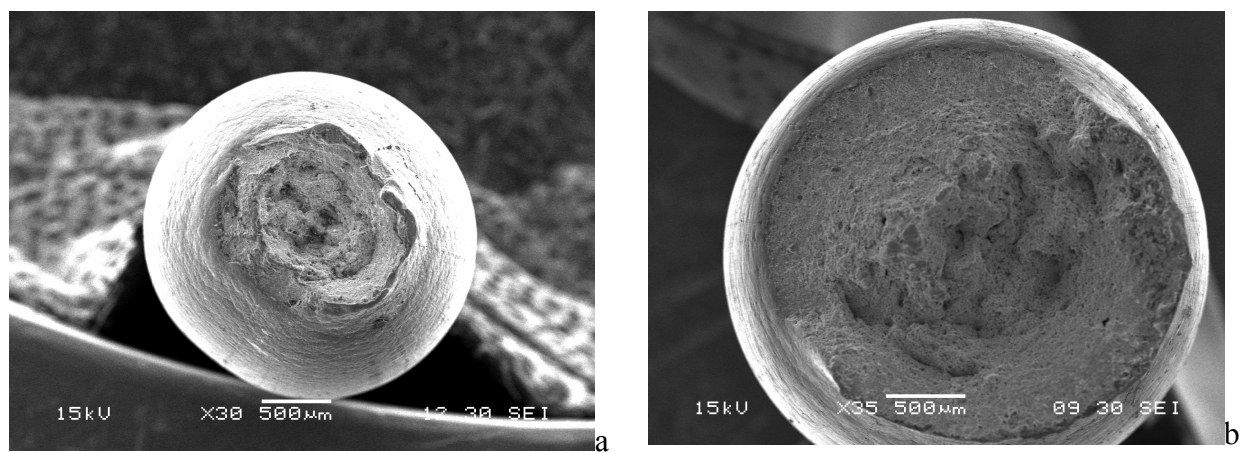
Fracture surface of a) CuC0 and b) CuC9 covetic for the tensile test.
